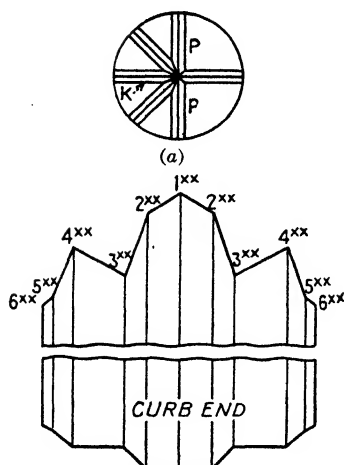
Intersecting center jack-bar miters *K*. (a) Plan of intersecting jack-bar miters *K* and *P*.
